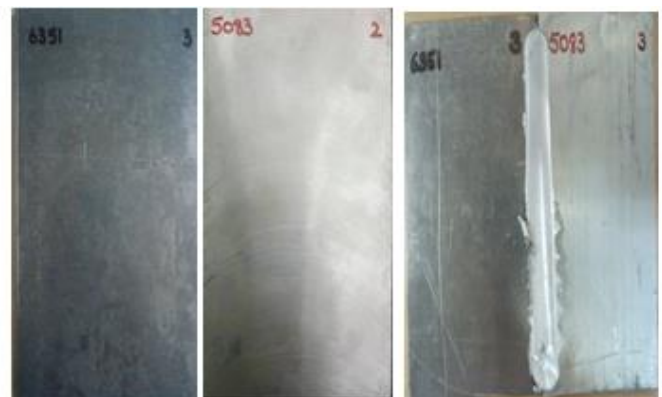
a) AA 6351-T6 b) AA 5083-H111 c) welded plate
